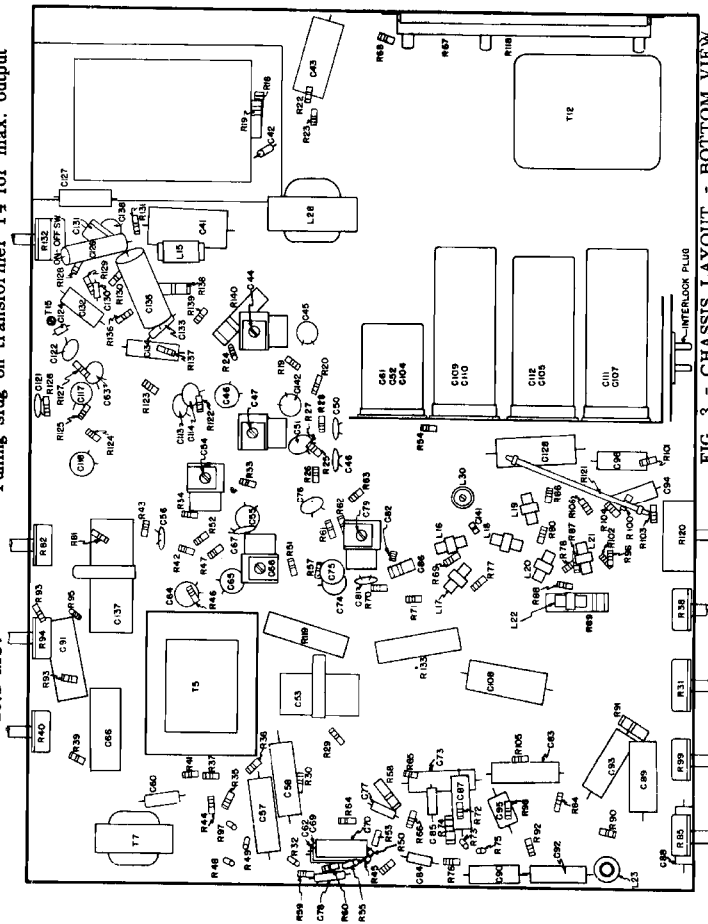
CHASSIS LAYOUT - BOTTOM VIEW
